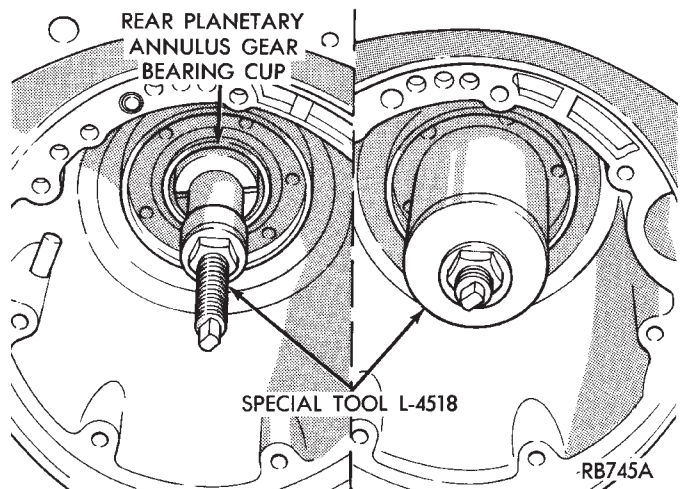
Remove Rear Planetary Annulus Gear Bearing Cup
